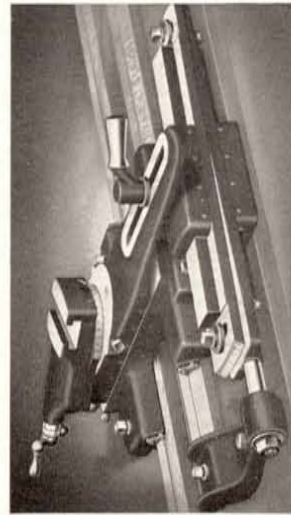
Plain Taper Attachment for 9-inch Lathes
